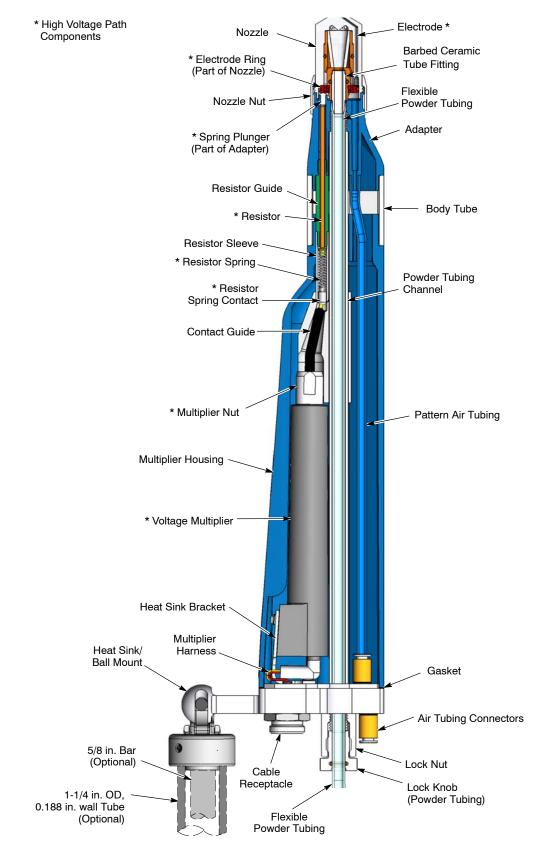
Section View – Bar-Mount Gun Components and Assembly
